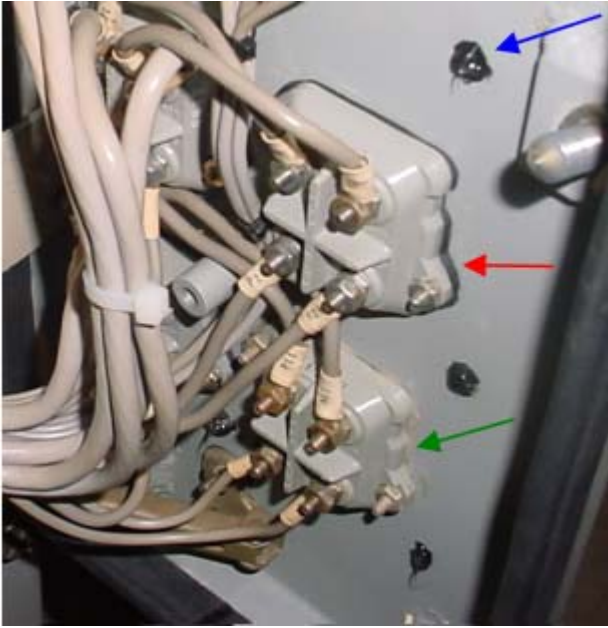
Dripshield Mounting Bolts, Acceptable Seals
